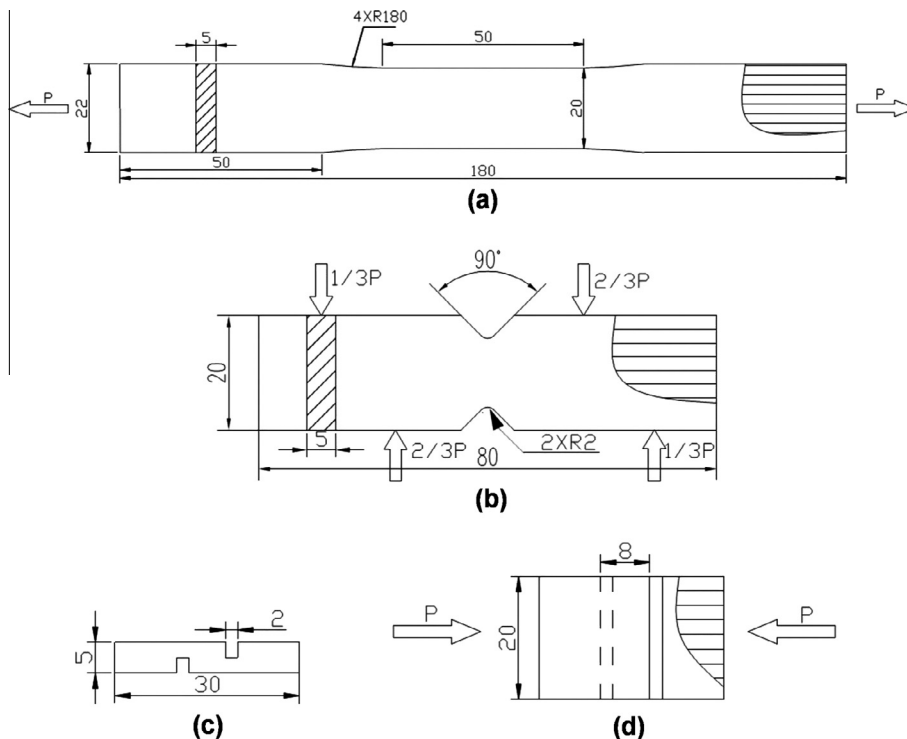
Shape and dimensions of (a) tensile specimen, (b) iospescu shear specimen, (c) front view of double notch specimen and (d) vertical view of double notch specimen (dimensions in mm).
